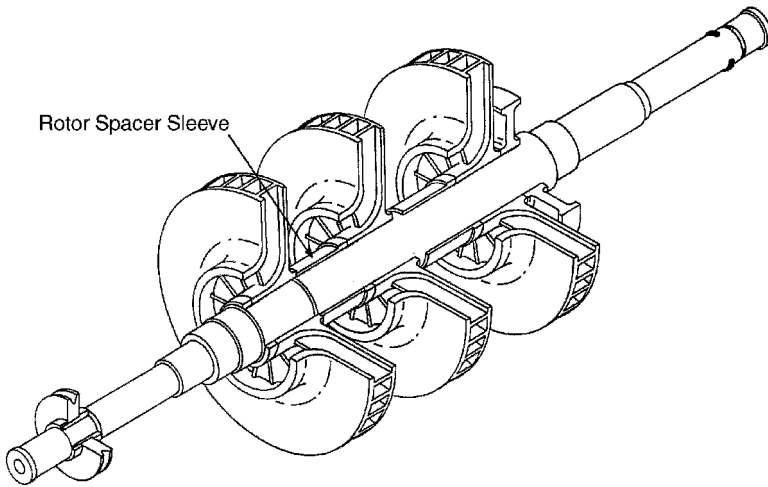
Spacer sleeves for a centrifugal compressor rotor. (*Dresser-Rand Company, Olean, N.Y.*)
